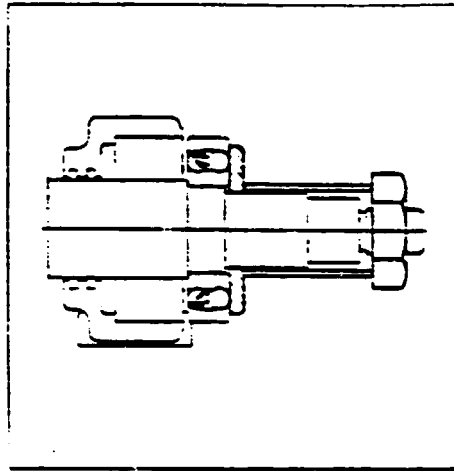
Installation of a bearing with angular movement (e.g. self-aligning roller bearing) with erection disk into the housing, in order to prevent canting of the outer ring.
